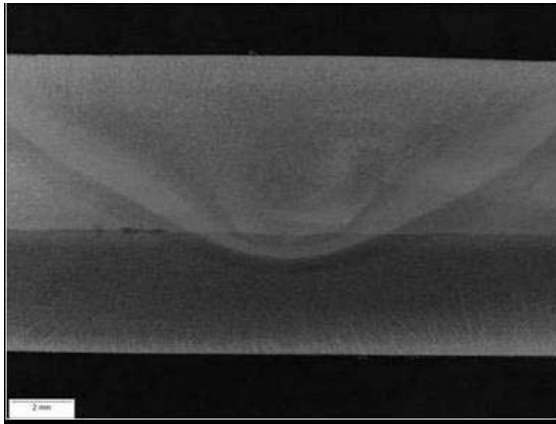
Metallography illustrating a friction stir welded lap interface in steel.
